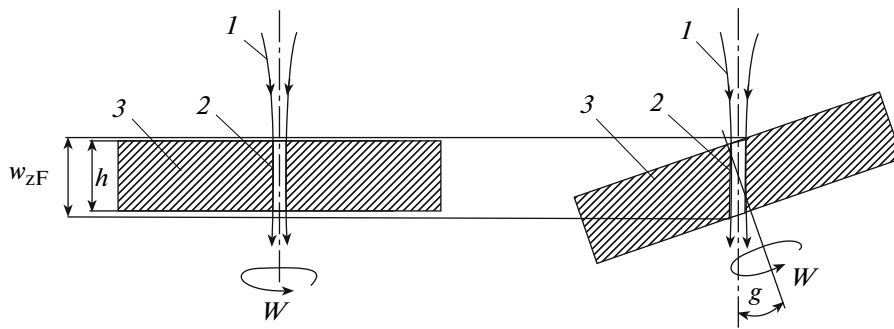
Schematic of hole drilling in the h -thick blank rotating with the speed w : (1) focused laser beam; (2) hole cavity; (3) blank; g is the inclination angle of the rotation axis
